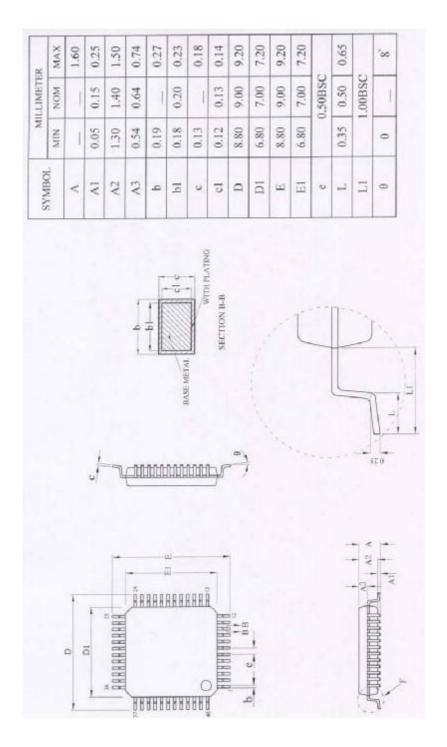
LQFP48-7x7mm Package Dimension Parameter
